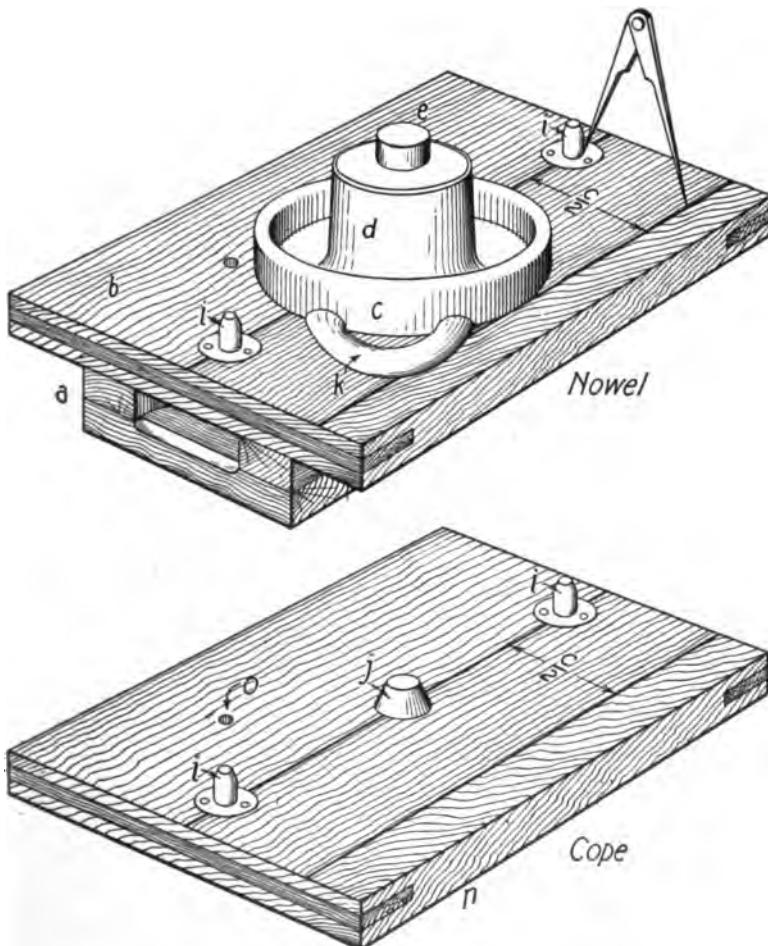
Simple Form of Molding Machine which Embodies Stripping-Plate and Turn-Over Ideas
